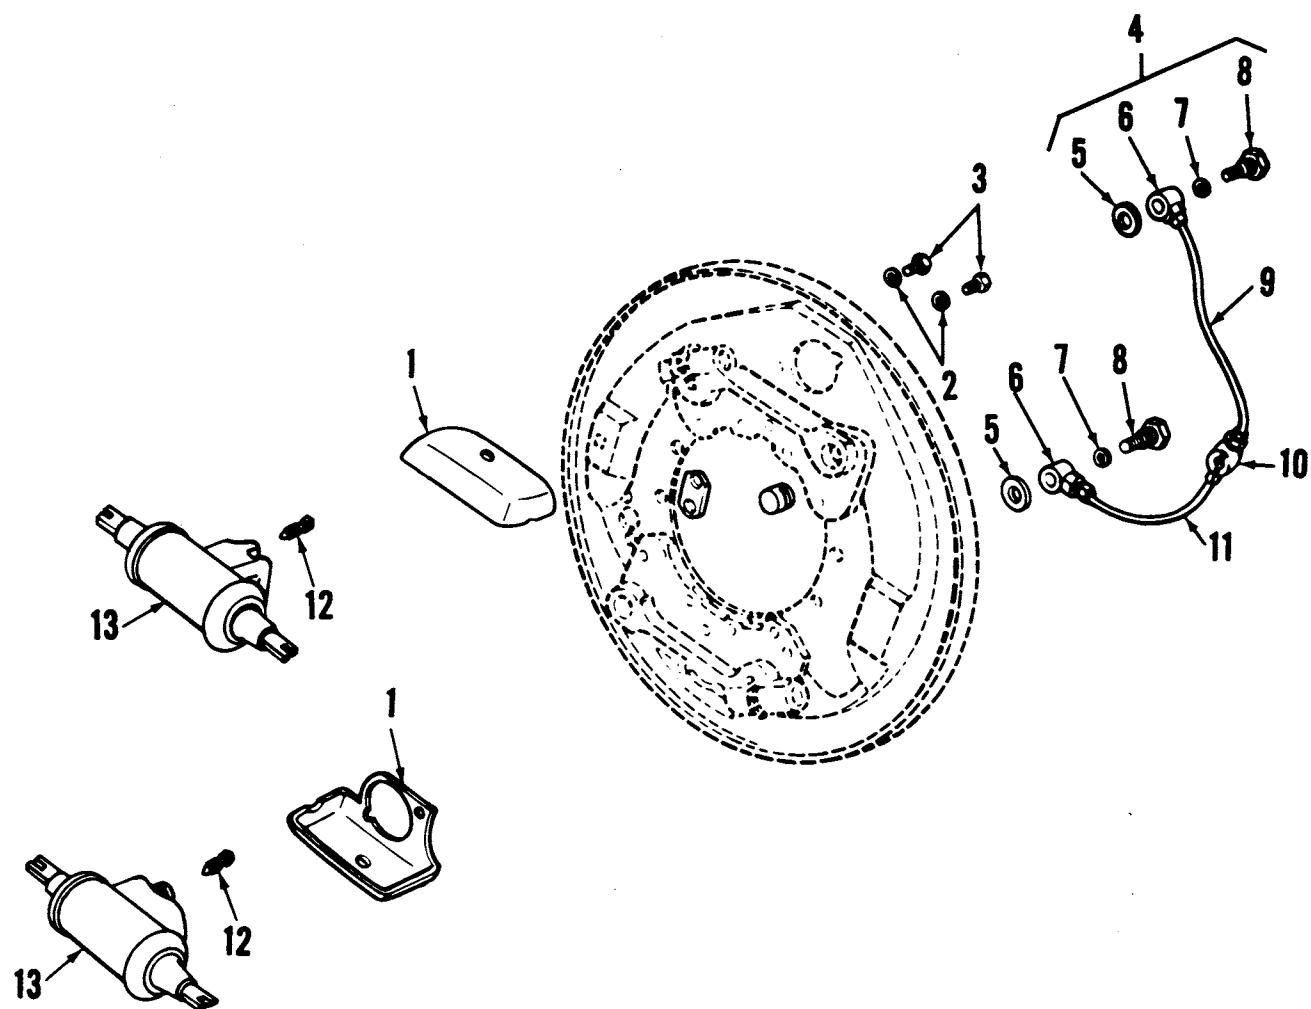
Wheel Cylinder and Hydraulic Tubes.
